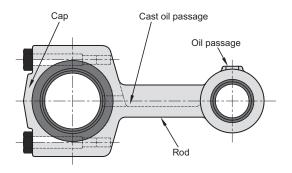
Schematic diagram of a connecting rod. Courtesy of Ingersoll Rand Company.
